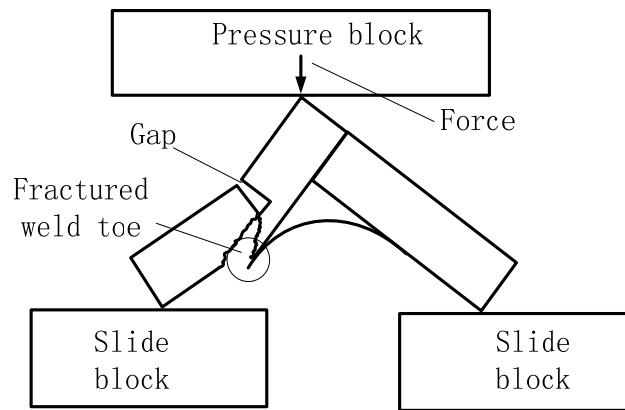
Fractured weld toe. (Adapted from [5]) The detected weld toe is torn up with the pressure and tow slide blocks. Finally, the specimen splits into two pieces.
